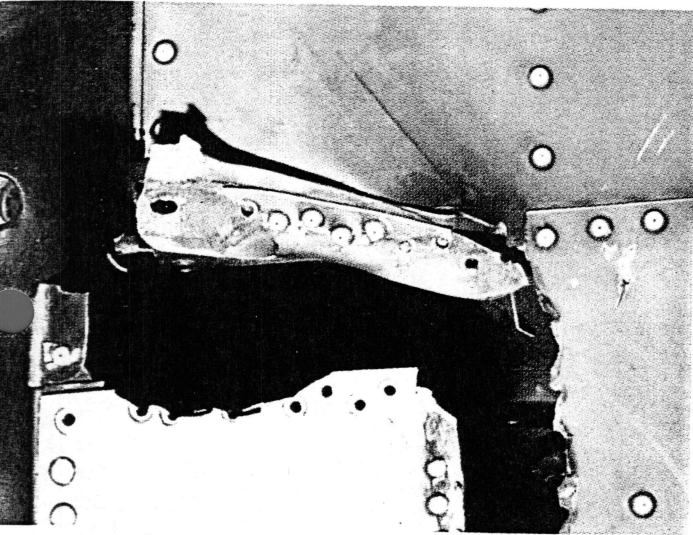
Fatigue failure of aircraft sheet metal assembly.
